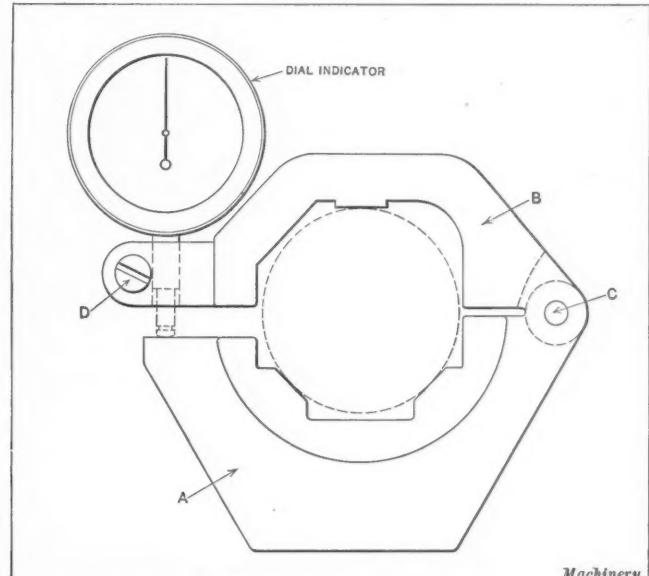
Three-point Dial Indicating Device for testing Crankshaft Bearings
